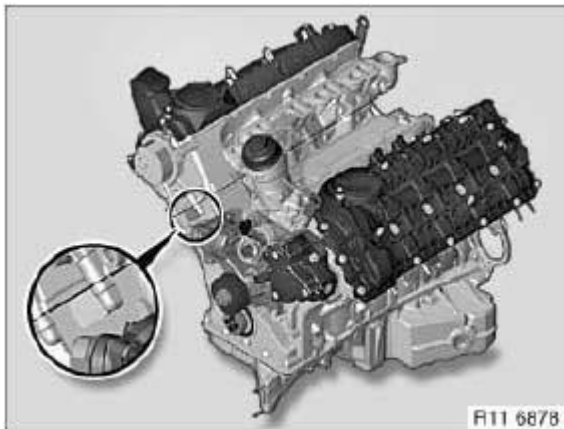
Identifying Engine (M47/M47TU/M47T2)
